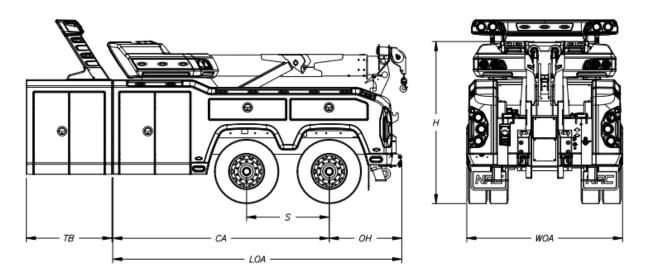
CHASSIS DIMENSIONS (EXAMPLE)
